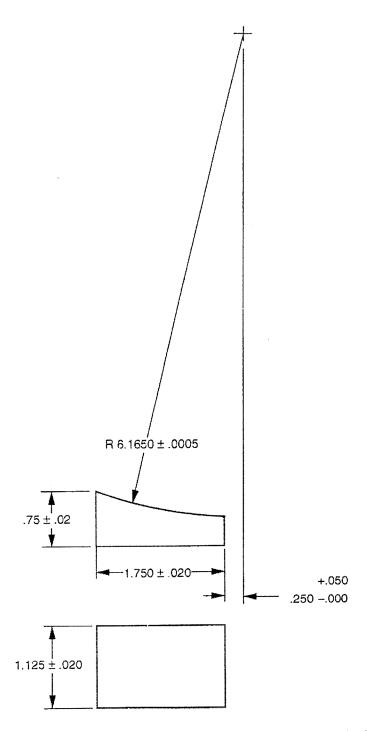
Concave inspection fixture pressure pad. (2 required)
